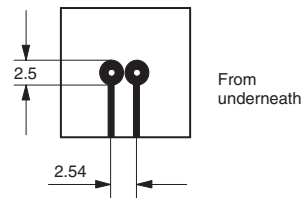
In Case of Assembly on PC Board, no Heatsink (Curve C, Figure 4)
